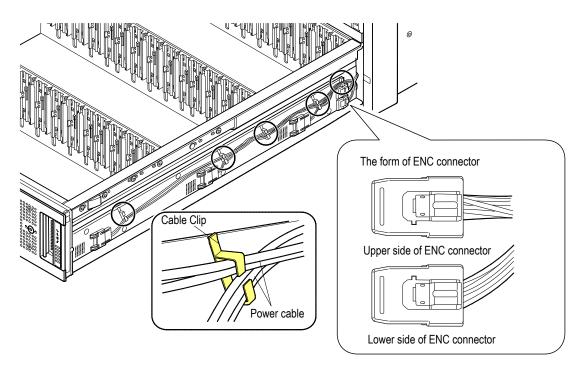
Form of ENC Connector and Fixing Power Cables
